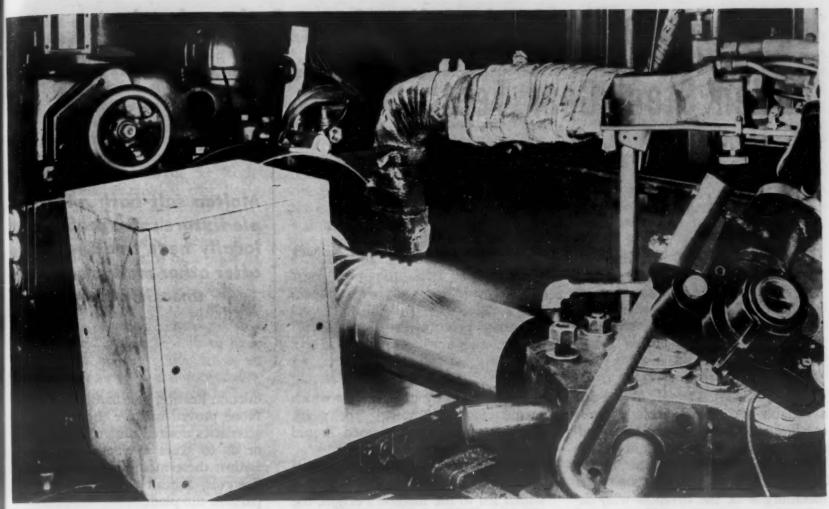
In early experiments with hot machining, this flame hardening torch was used to heat the workpiece.
